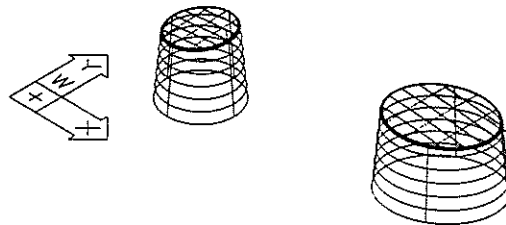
Fillet surfaces constructed on the raised buttons, display set
